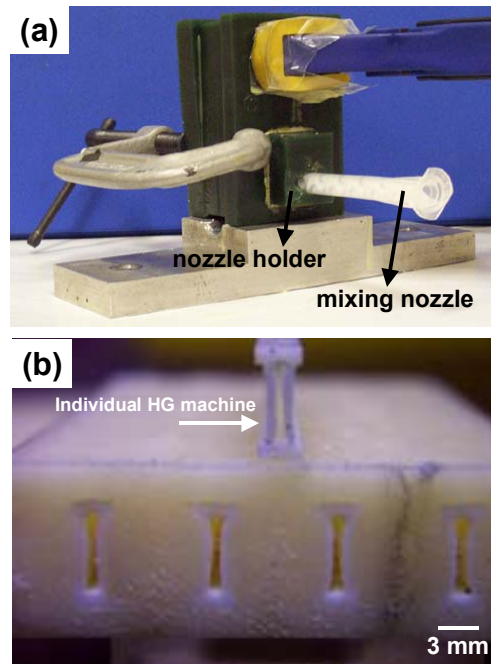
(a) Vertical injection molding set up (b) 4 HG machine reinforced composite shape.
